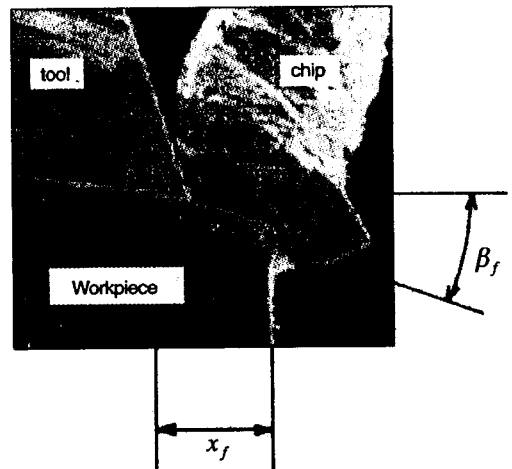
Fracture during burr formation in machining Al6061-T6.
